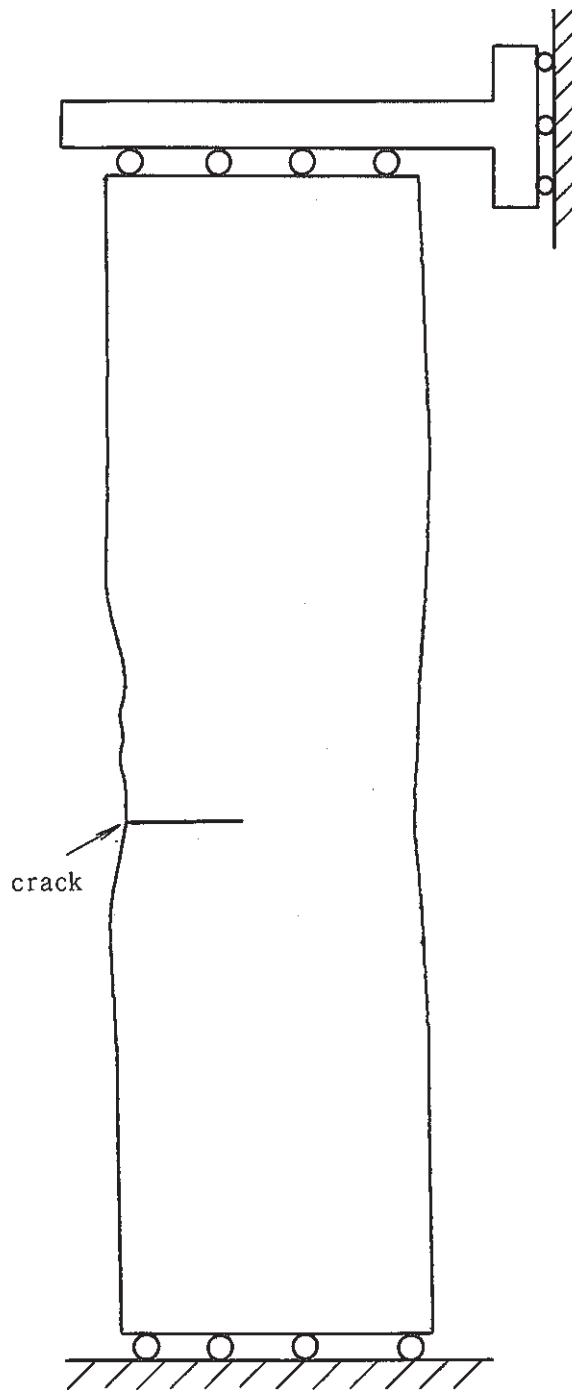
Mechanically Boundary Condition of Finally Welded Joint
